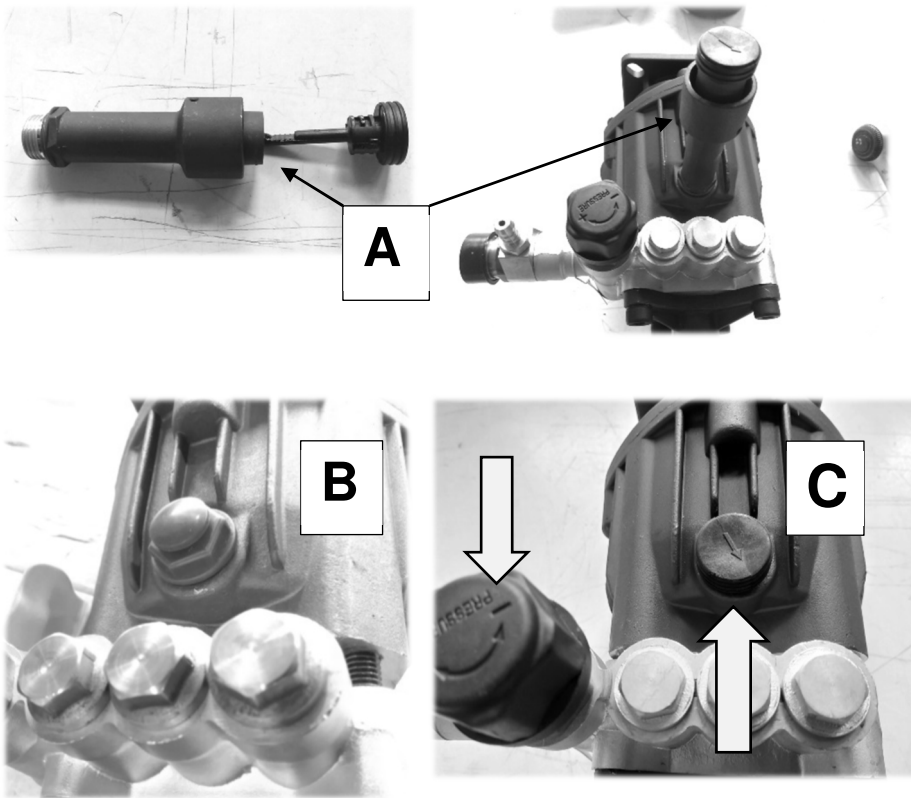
Figure A shows the pump's vent plug, which should be screwed onto the red transport plug (B) located on top of the pump housing. The transport plug is only for transport and the device must not be used without replacing it with the vent plug!
